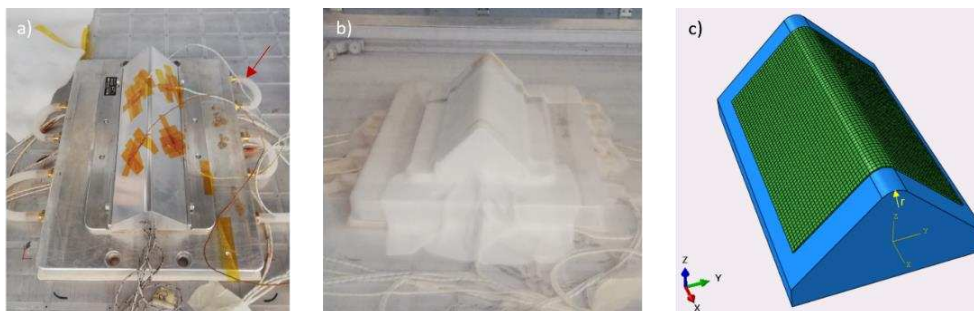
a) Tool with thermocouples, heating cartiges and cooling (red arrow); b) setup during curing; c) FEM modell
